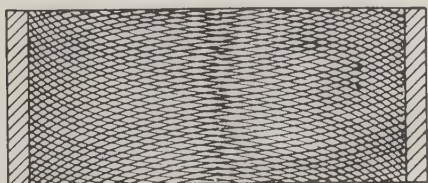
Crosshatch appearance of a properly honed cylinder bore. (Briggs & Stratton Corporation)
